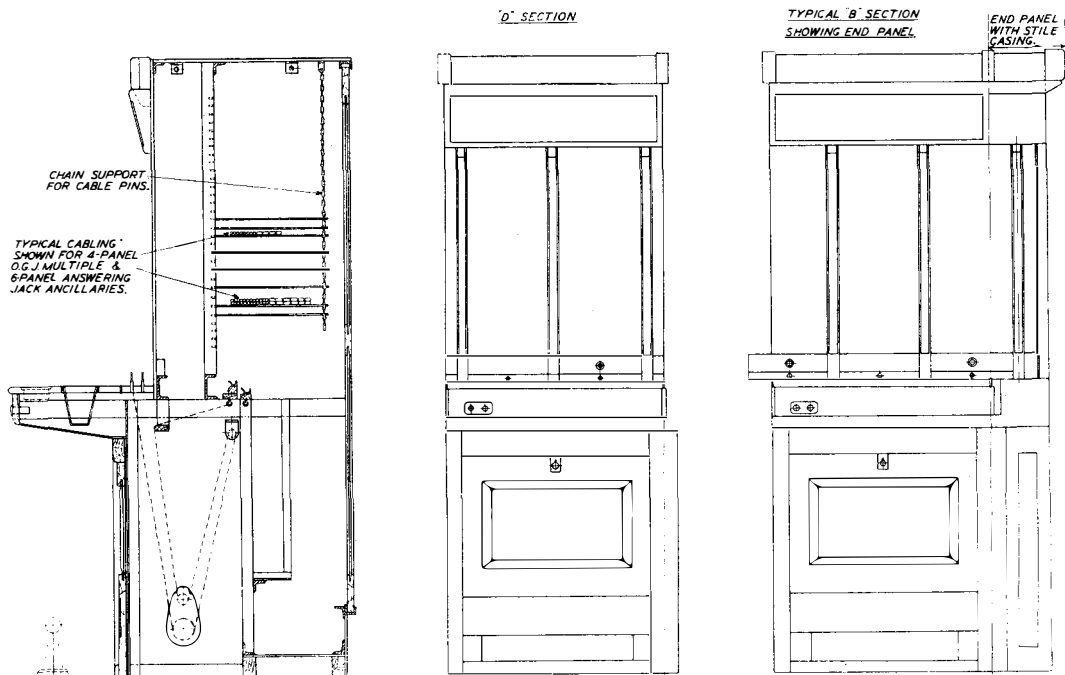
CONSTRUCTION OF SECTION, D SECTION, AND END PANEL.
